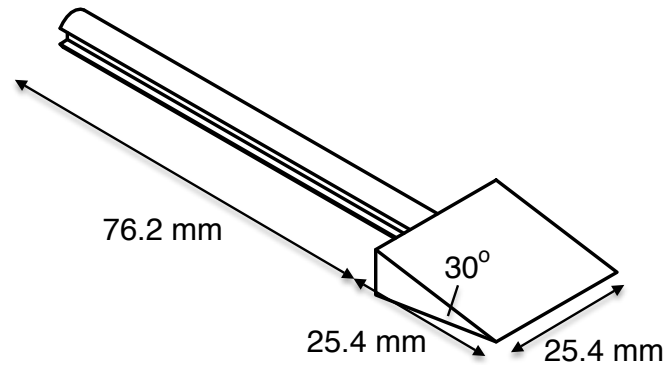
A drawing of the wedge model used for PCT measurements.
